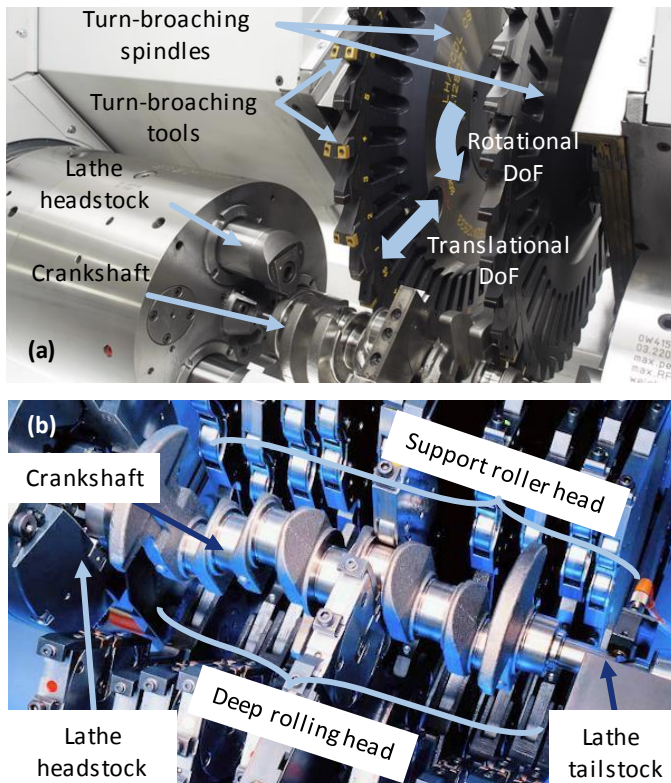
Crankshaft (a) turn-broaching (b) deep rolling machines [5], [10].
